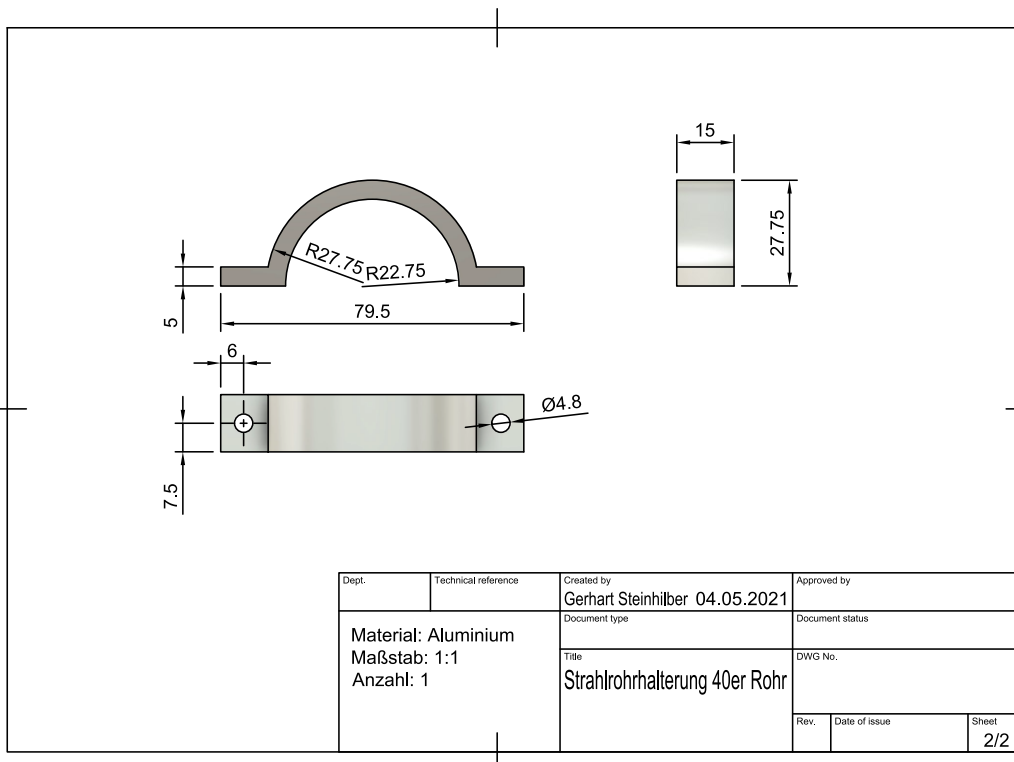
Technical drawing of the upper half of the small beam pipe holding clamp.
